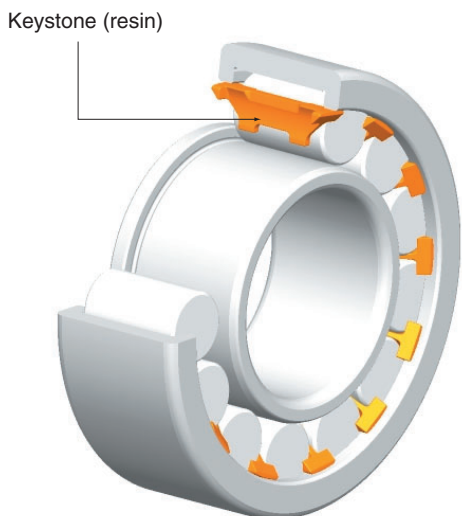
High Load Capacity Cylindrical Roller Bearings
